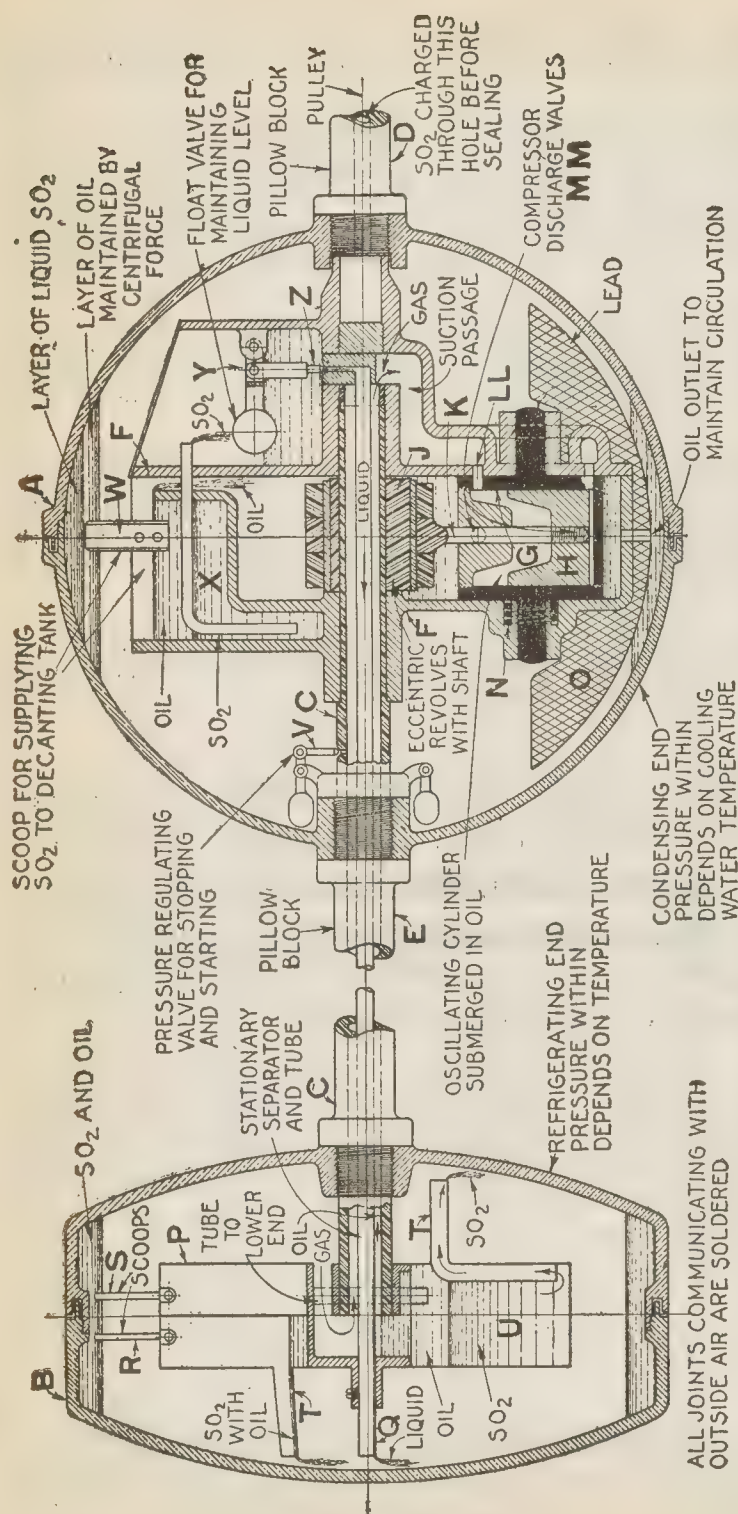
,682.—Sectional view of Audifren ice machine showing mechanism. In construction, bells A and B, are hermetically sealed at all seams. Machine is charged at factory, after evacuation of air, with SO_2 and pure mineral oil. In operation, bells A and B revolve with hollow shafts D and EC. Carrier F, is held stationary by counterweight O, the shaft revolving within it. Carrier supports two oscillating compressors G. Compressors are double acting and driven by eccentric F. Vapor is drawn by motion of piston H, through hollow shaft and port LL, into cylinder. Return stroke compresses vapor, expelling it through spring valves MM, into the surrounding space. Vapor condenses upon walls of A, and collects with surplus oil at rim. Scoop W, carries mixture to decanting box X, oil overflows over bearing surfaces, and liquid SO_2 is delivered to interior of evaporator B, and expands again to vapor under suction of the compressors. Spent gas returns through hollow shaft. Separator V and P, collects surplus oil carried over with liquid SO_2 and returns it in the stream of spent gas, to the condenser end. There is no chemical action, and no deterioration of the gas or oil. When machine is stationary, pressure in both bells is equalized through valve V, which closes by centrifugal force, isolating the condenser from the evaporator when running. Power required to compress the gas is derived through the shaft and eccentric. Torque created is resisted by weight of carrier assembly and counterweight, which rises about 15° from vertical. Variation in condenser pressure (and temperature) and variation of evaporator pressure (and temperature) directly affect torque required. If either brine temperature or condenser temperature becomes excessive counterweight will revolve and readjust pressures automatically.
